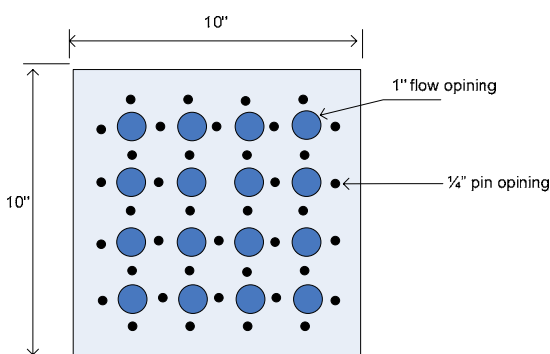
a Top view of the Upper Plate with 25.4 mm (1") Flow Opening Holes and 6 mm (1/4") Pins Holes
